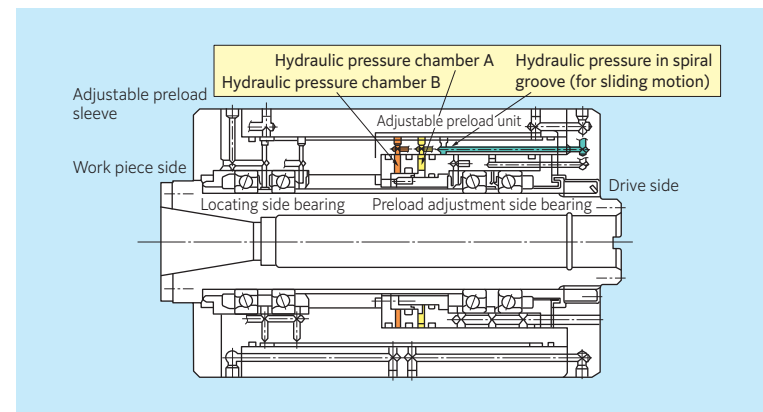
Typical spindle configuration incorporating 3-step Adjustable Preload Type Bearing Unit
